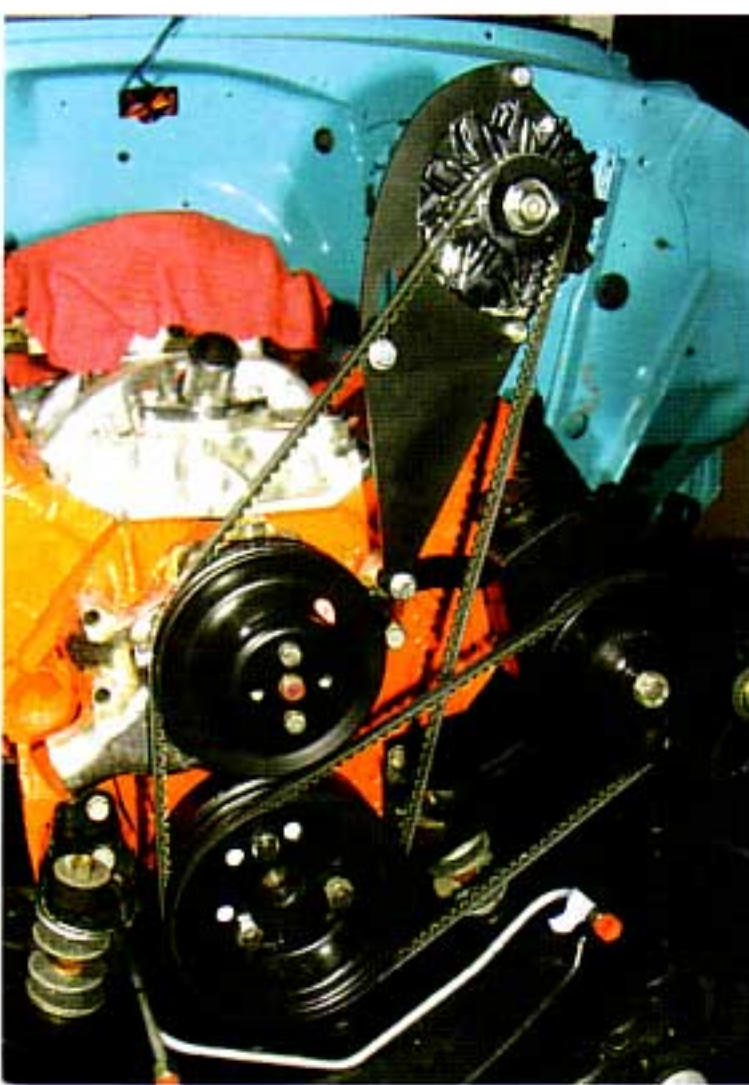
The alternator or generator must be adjusted inboard far enough so the belt will not interfere with the power steering pump. The P/N 18-115 alternator mounting bracket mounts the alternator inboard of the driver's side valve cover. This allows the alternator belt to pass by the power steering pump with no interference. The bracket attaches to the two front intake manifold bolts and the upper water pump bolt on the drivers side.
